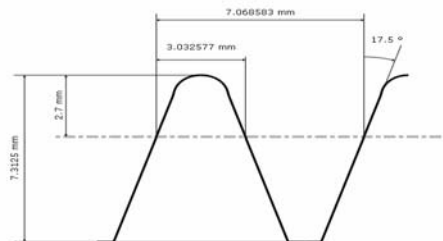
Original Hobbing Cutter for Pinion – full fillet
